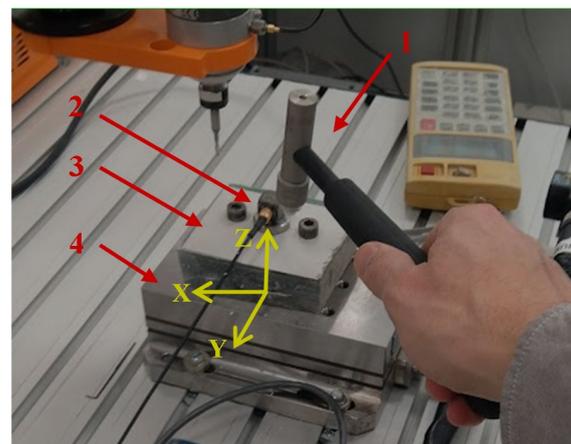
Impact test of experimental bench: 1 – impact hammer, 2 – three-axial accelerometer, 3 – workpiece, 4 – dynamometer.
